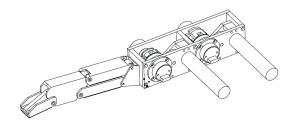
3D "leading" finger design together with drive systems, elastic clutchs and measurement sensors (transducers) developed within the ProEngineer software package.
